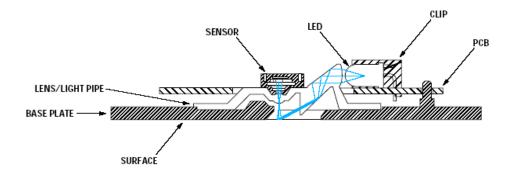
Sectional view of PCB assembly highlighting optical mouse components.
